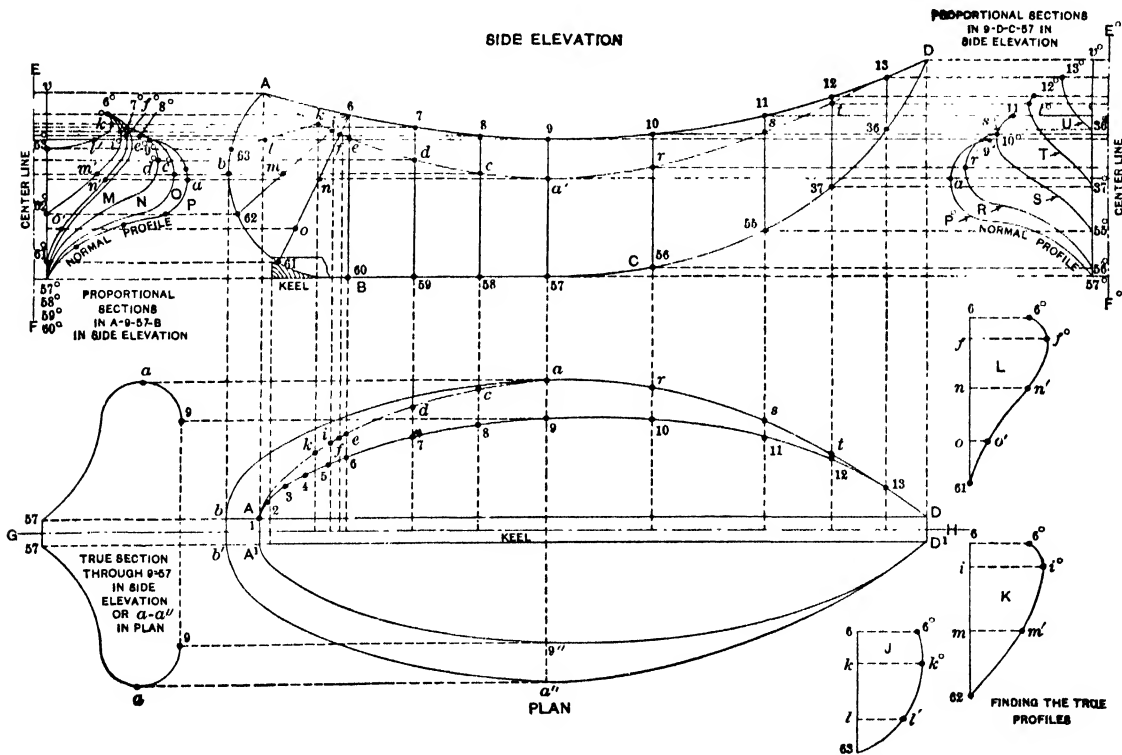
Plan, Elevation and Method of Finding Proportional Vertical Section of Sheet Metal Boat
